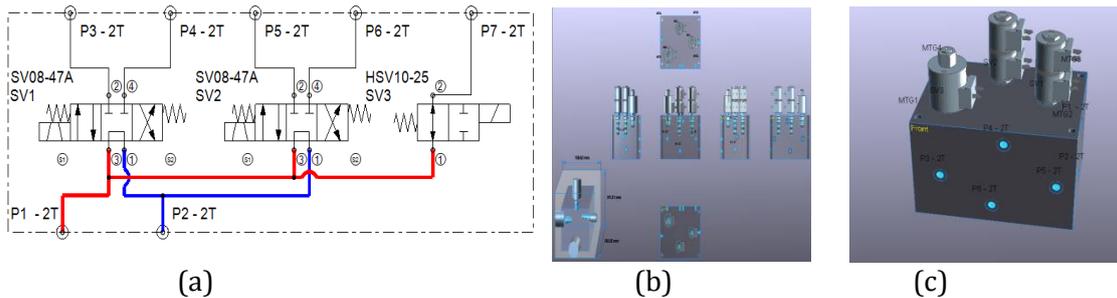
Hydraulic Manifold circuit. P1-2T: Pressure port, P2-2T:Return to tank, SV1 & SV2:3/4way solenoid valve, SV3:2/2way solenoid valve, P3-2T & P4-2T:Double acting cylinder 1 & 2 ports, P5-2T & P6-2T:Double acting cylinder 3 ports, P7-2T:Hydraulic motor port.
